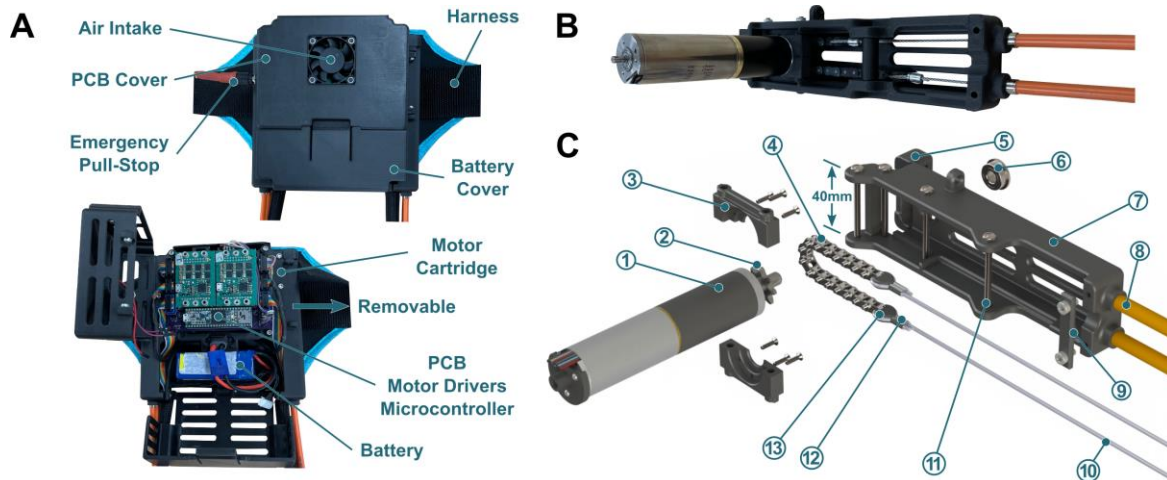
Waist assembly overview. A. Closed and open pictures of the waist assembly module and harness system. The waist assembly module housed the motors, motor cartridges, PCB, battery, and wiring harness. B. Assembled view of a motor cartridge assembly. C. Exploded view of a motor cartridge assembly. 1) A 90W Maxon motor with an 89:1 gearbox. 2) An 8-tooth sprocket welded onto the gearbox output shaft. 3) Reinforced motor blocks were the interface between the motor and cartridge. 4) A chain driven by the sprocket actuated the cable transmission. 5) A sliding cover on each cartridge permitted easy access to the chain assembly 6) A thrust bearing supported the motor shaft to prevent tip deflection during operation. 7) The cartridge was 3D-printed and reinforced with carbon fiber aligned with the long axis. 8) The Bowden sheaths guided steel cables down to the ankle assembly. 9) Wire strain relief. 10) Steel cable looped through final link on each side of the chain and passed through the Bowden sheath. 11) Steel bolts held the motor subassembly in place within the cartridge and attached the cartridge to the rest of the motor assembly. 12) A crimped swage held the steel cable looped through the chain. 13) A small guide component prevented cable stress concentrations and failure.
